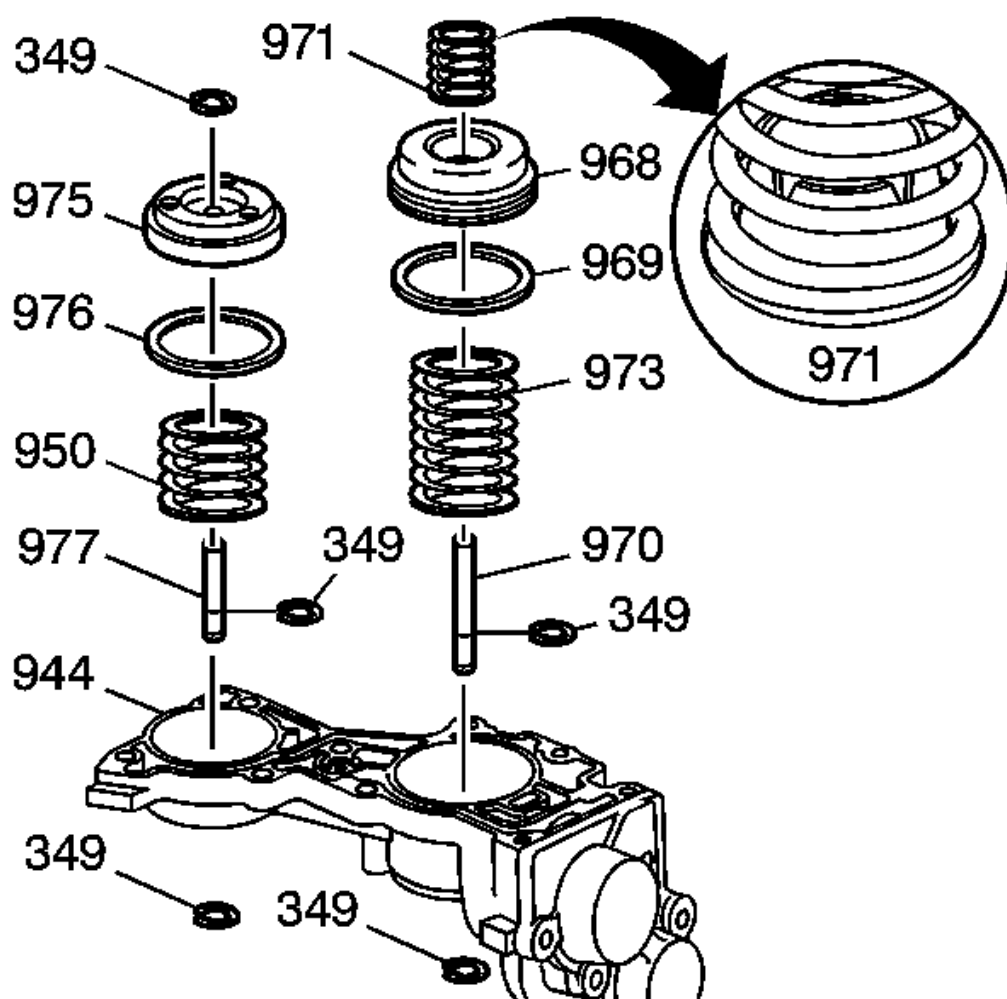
Identifying 1-2 Accumulator Assembly & 3-4 Accumulator Assembly
